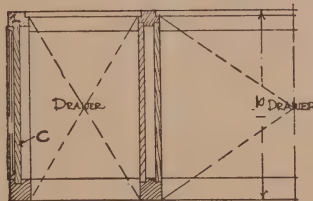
Enlarged Part Horizontal Section above Drawers
